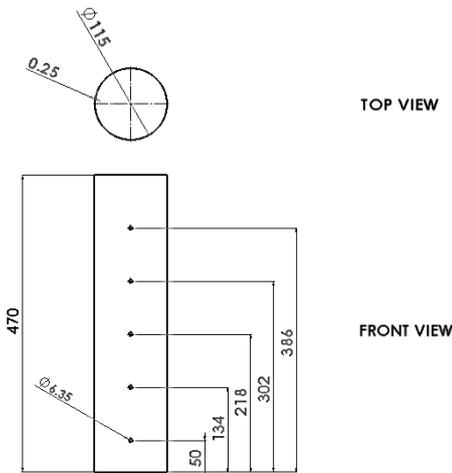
Core of the biochar kiln (dimension displayed in millimeters)
